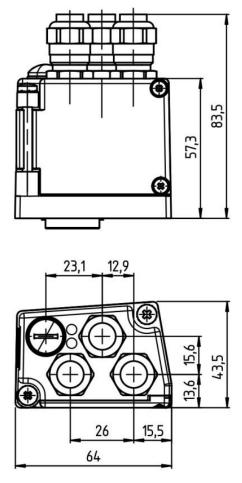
Dimension drawing BE 901 MK PB connection hood (all dimensions in mm)
